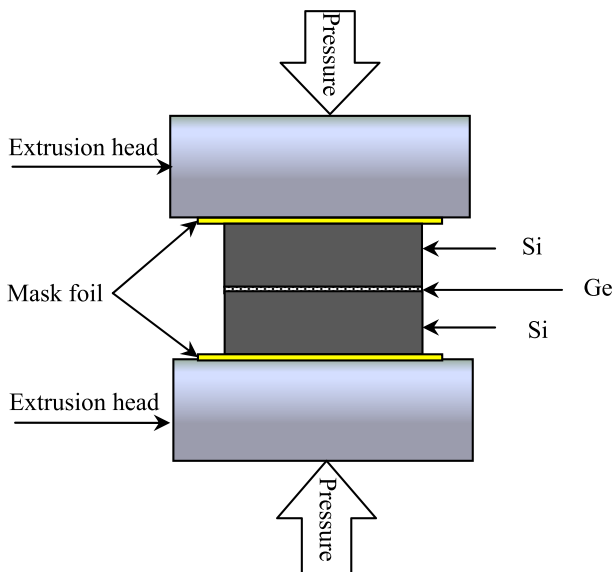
Experiment setup showing assemble for diffusion brazing Si with Ge interlayer.
